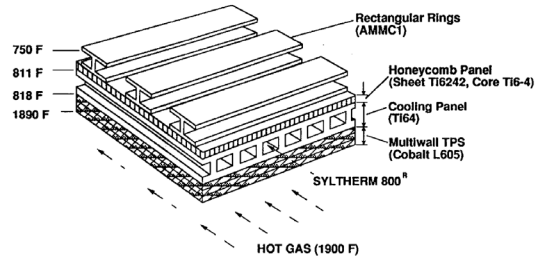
Wall construction for cooling airframe and engine hot sections[3]
